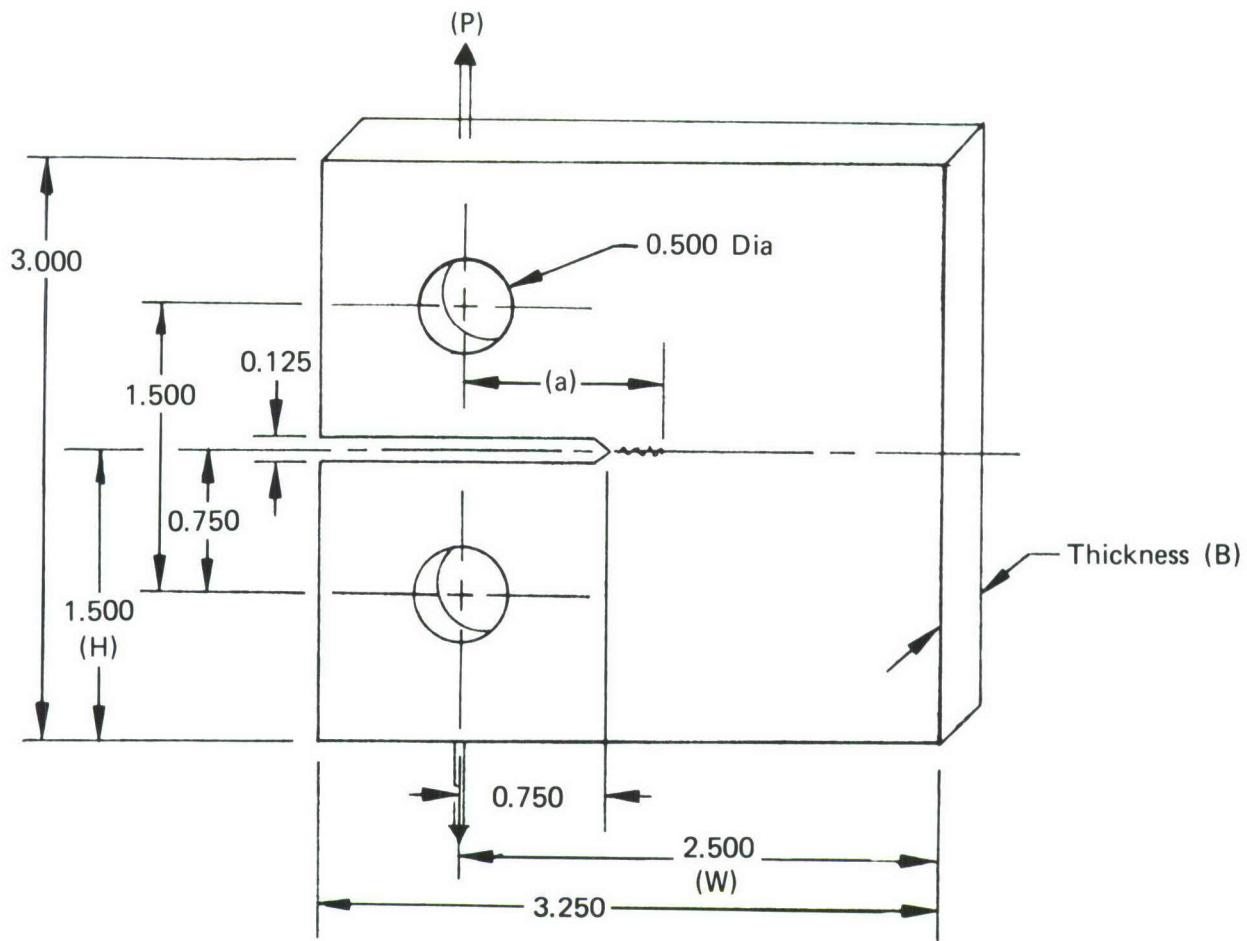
Standard Fatigue Threshold and Crack Propagation Sheet Specimen
